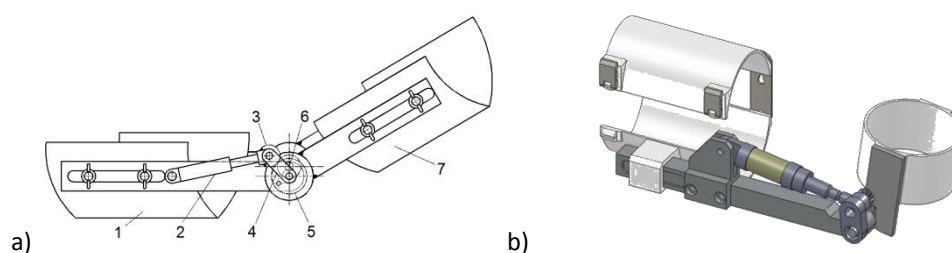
Schema (a) and design (b) of a haptic elbow arm exoskeleton module using geared linkage with double acting pneumatic cylinder
